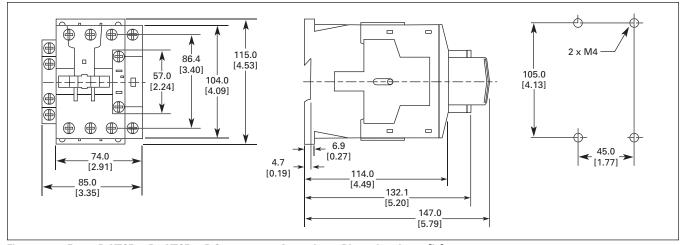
Frame D, XTCF063D - XTCF080D Contactors — Approximate Dimensions in mm [in]
